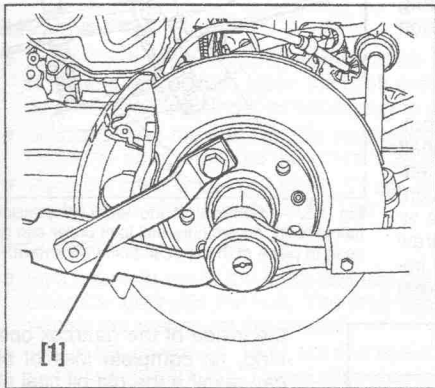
Counterholding the wheel hub during removal of a drive shaft nut. Arrange the tool lever (1) on the other side when the nut is tightened.
